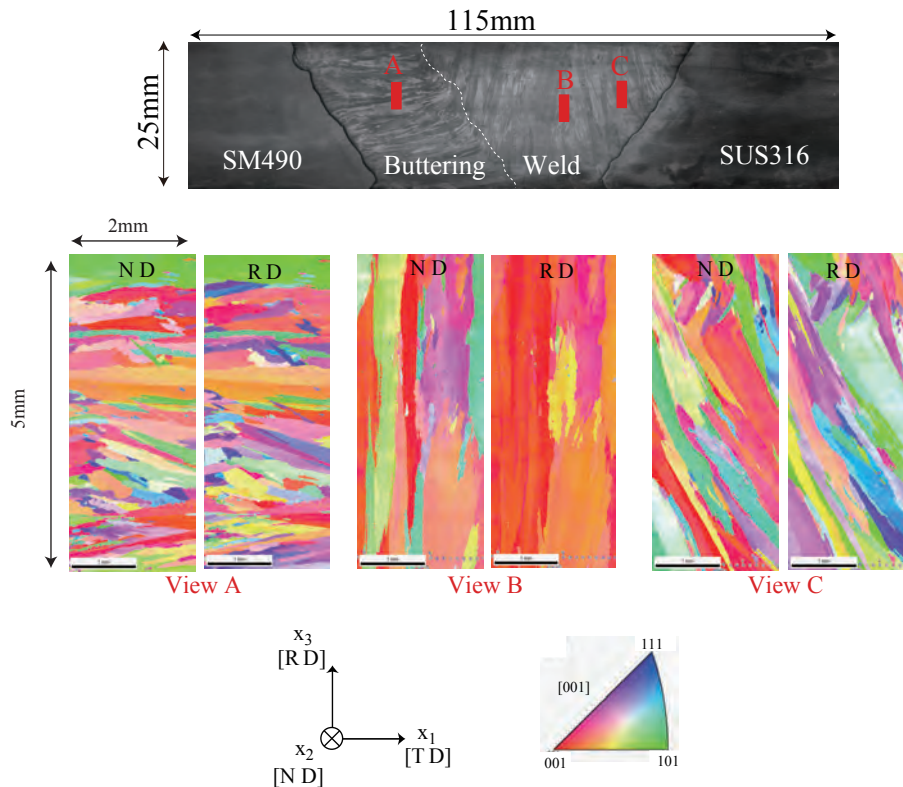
Photo of a dissimilar metal welding part (above figure) and EBSP pictures of view area A, B and C (bottom figures).
